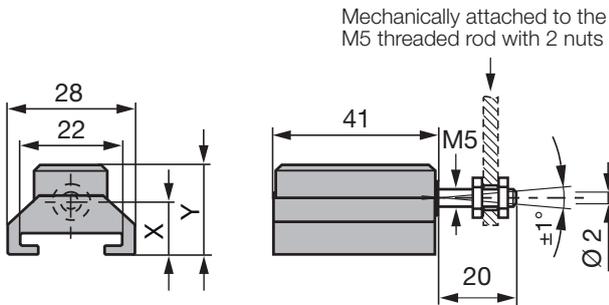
Installation dimensions of BTL5-M/N-2814-1S magnet
